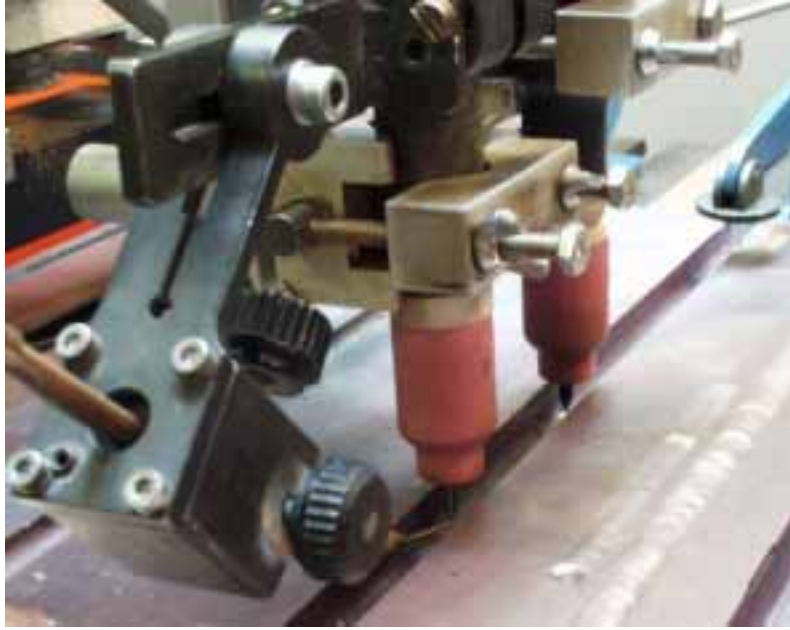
Two TIG welding nozzles in the same tool.
